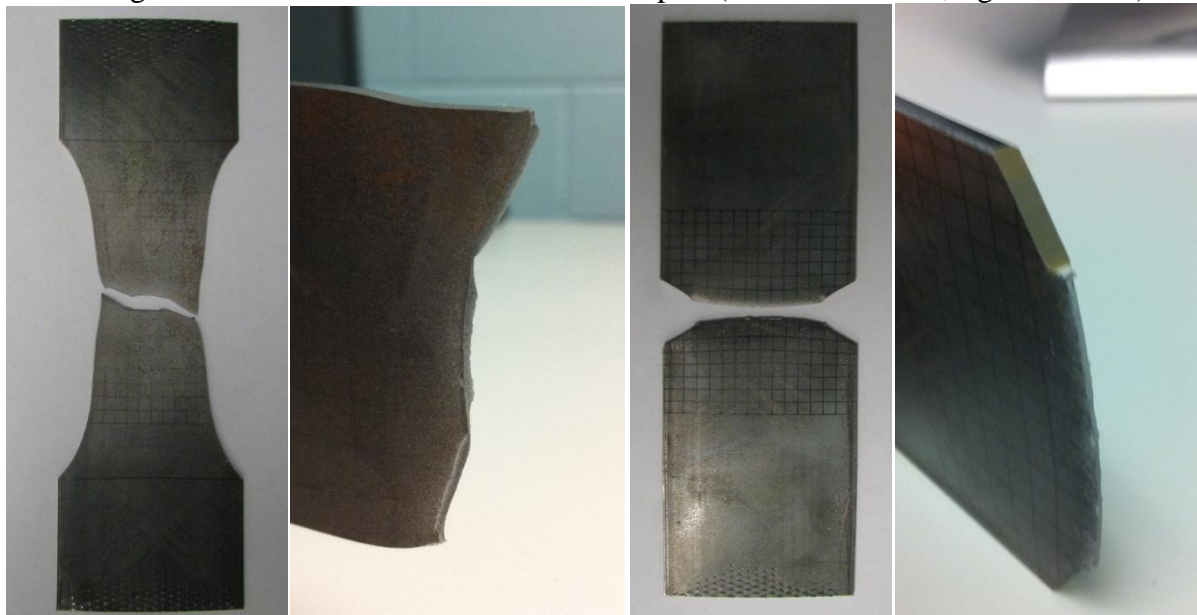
Fracture surfaces brittle steel samples (Left: un-notched, right: notched)
